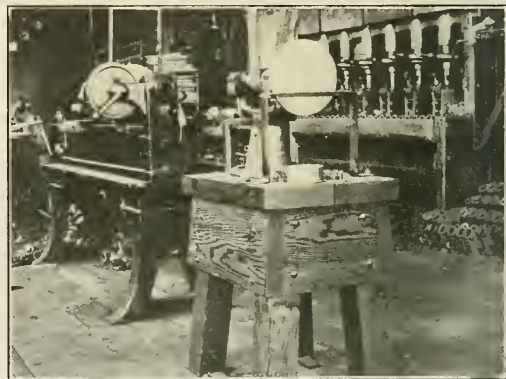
Simple Disc Grinder for Facing Slide and Graduating Valves
